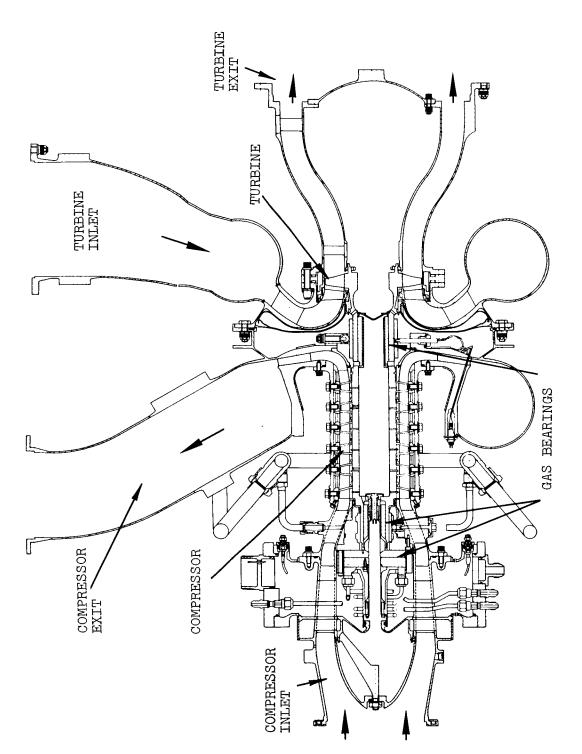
AXIAL FLOW TURBOCOMPRESSOR.
